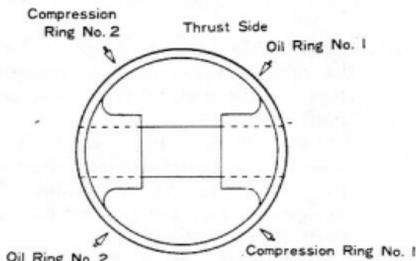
Spacing Piston X4957 Ring Gaps
